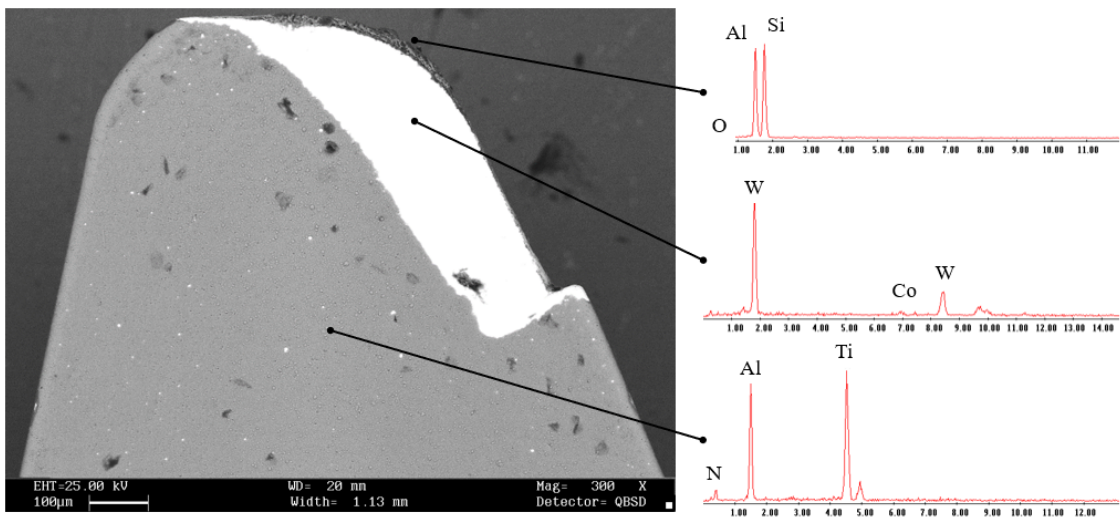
Tool after etching: feed of  $f = 0,06 \text{ mm rev}^{-1}$  , cutting speed of  $V_c = 120 \text{ m min}^{-1}$  and material removal of  $MR = 660 \text{ mm}^3$  using conventional turning
